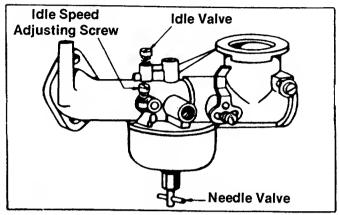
CARBURETOR ADJUSTMENT ADJUSTING CARBURETOR CHOKE
